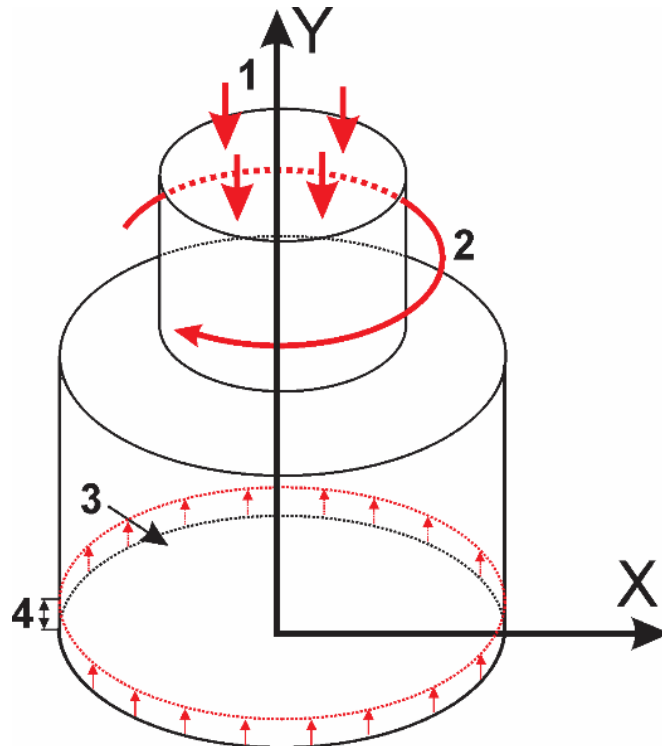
Schematic of FSSW process: 1-axial force; 2-rotational speed; 3- initial contact surface between the tool and workpiece; and 4 penetration depth
